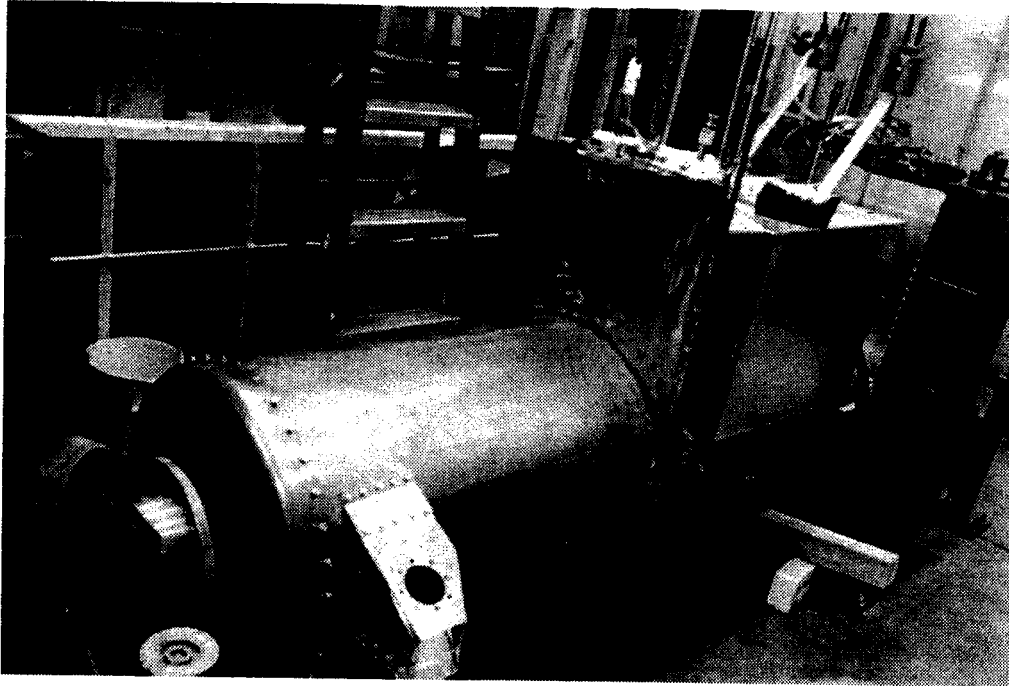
Quad triplet with LHe vessel completed and shield partially assembled.
